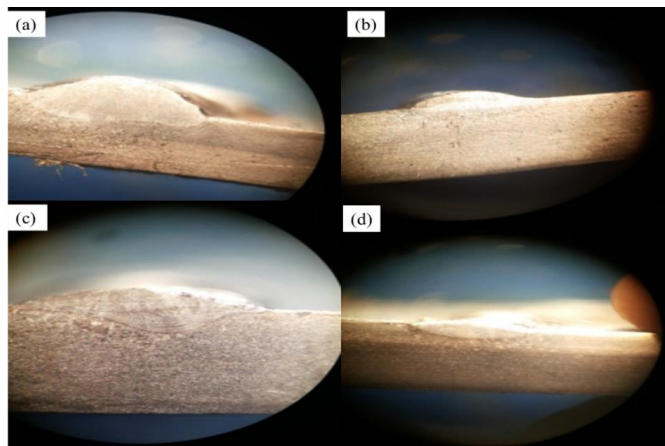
(a-b) Weld bead deposition without magnetic interaction; (c-d) weld bead deposition with magnetic interaction.
